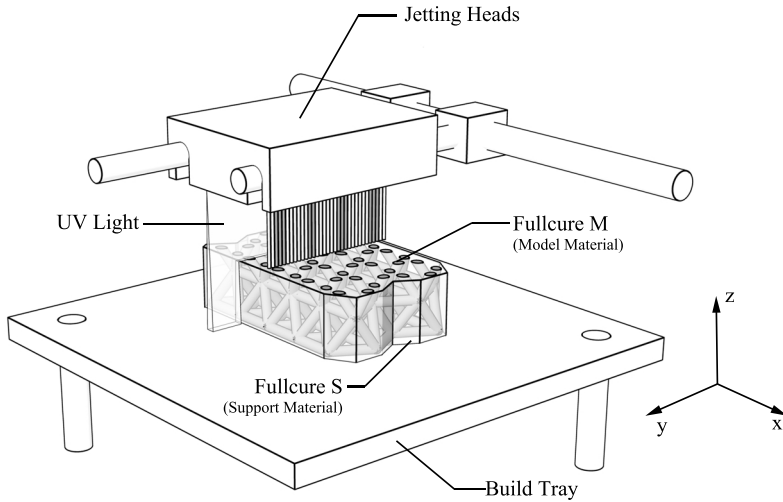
Production principle for jetted photopolymer process; This technique is used to produce all specimens
